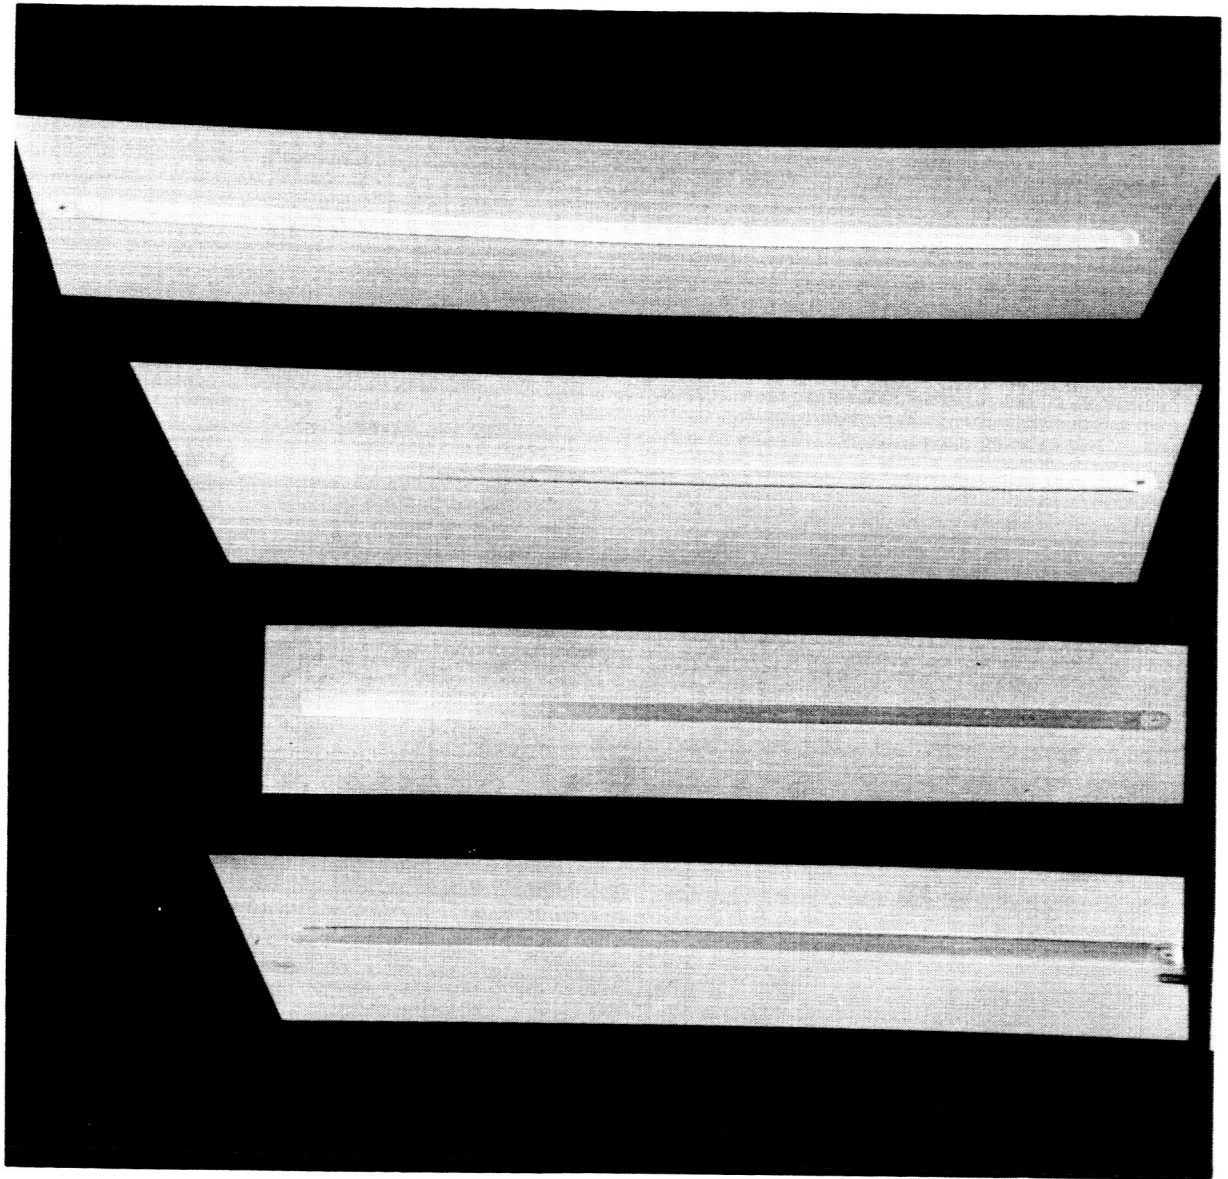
Bead-on-Plate GTA Welds on 0.030 Inch Powder Metallurgy W-25Re-30Mo Alloy Sheet
